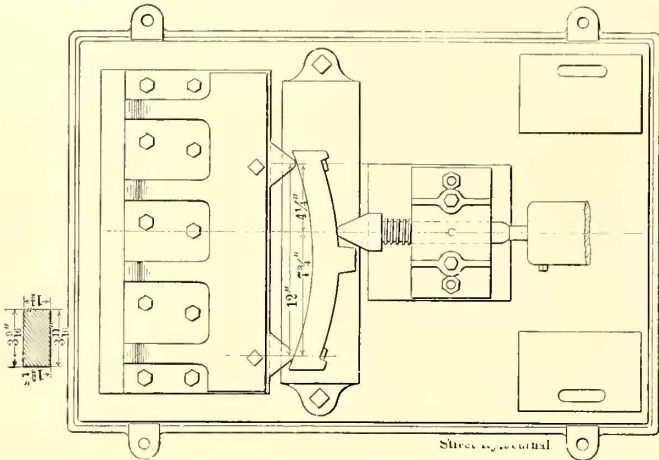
PLAN OF MACHINE FOR TESTING BRAKE-SHOES, AND SECTION OF SHOE
